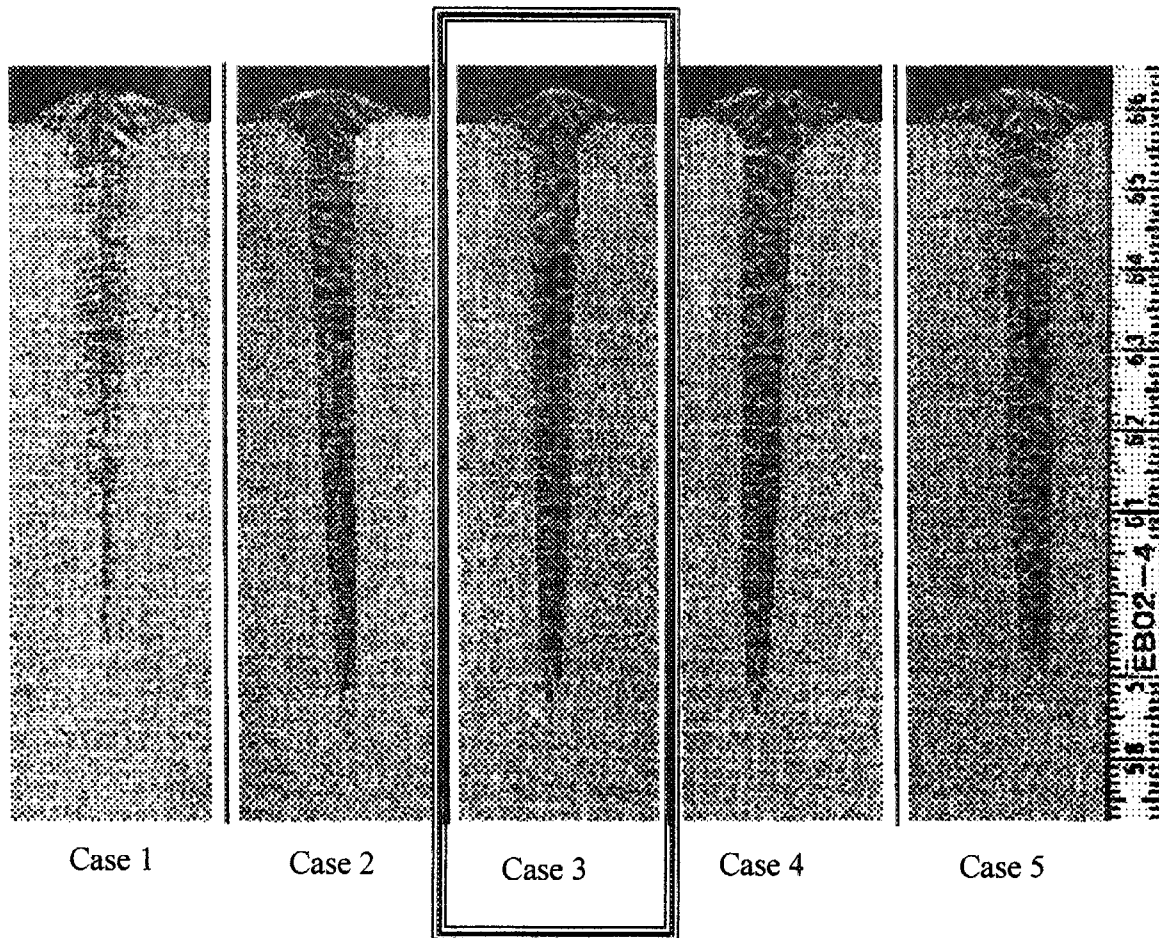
Macroscopic photographs of cross sectional view of welding bead by high voltage welder tests
